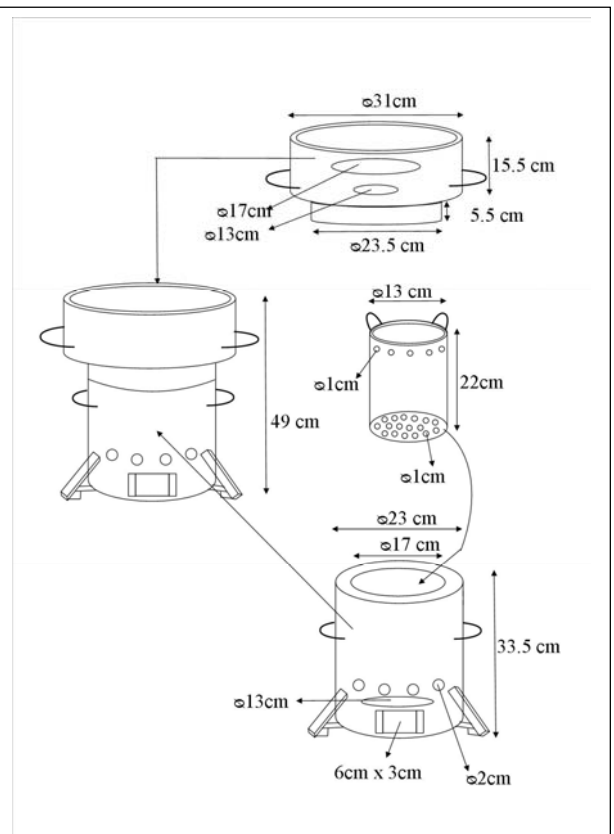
Ceramic lined gasifier by KIRDI. Technical drawing by Barbara Njeri
